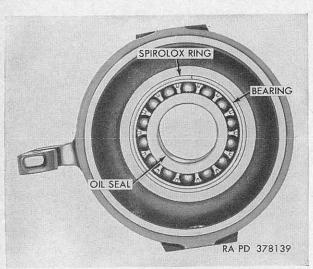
Inside of steering knuckle showing spirolox ring and oil seal.
